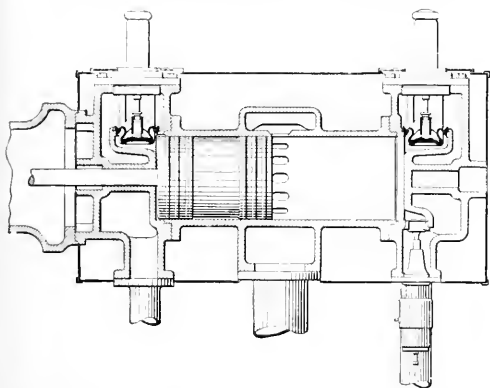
SECTIONAL VIEW OF UNIFLOW CYLINDER
